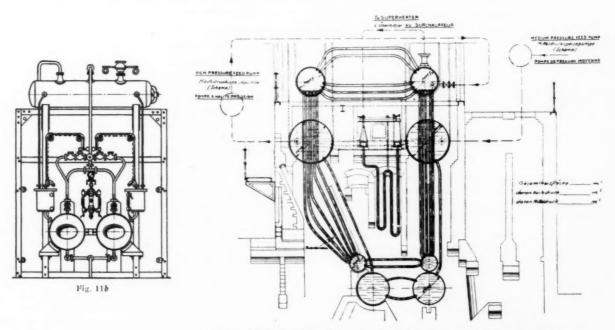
High-Pressure Auxiliary Boiler Fitted with Vertical-Tube Boiler
